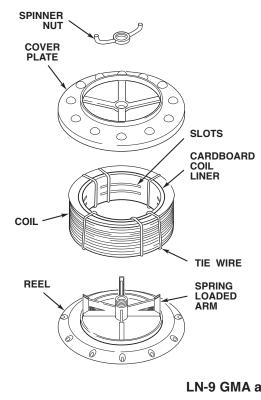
LOADING A 50 OR 60 LB. COIL
